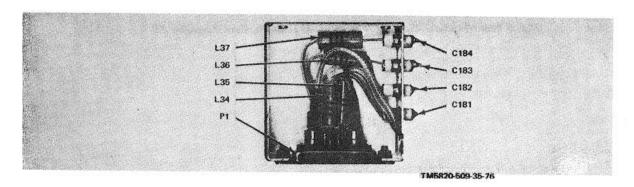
Oscillator Control C-4311 PRC-47 (A8A7), Line Filter Assembly At Connector P1, Cover Removed.
